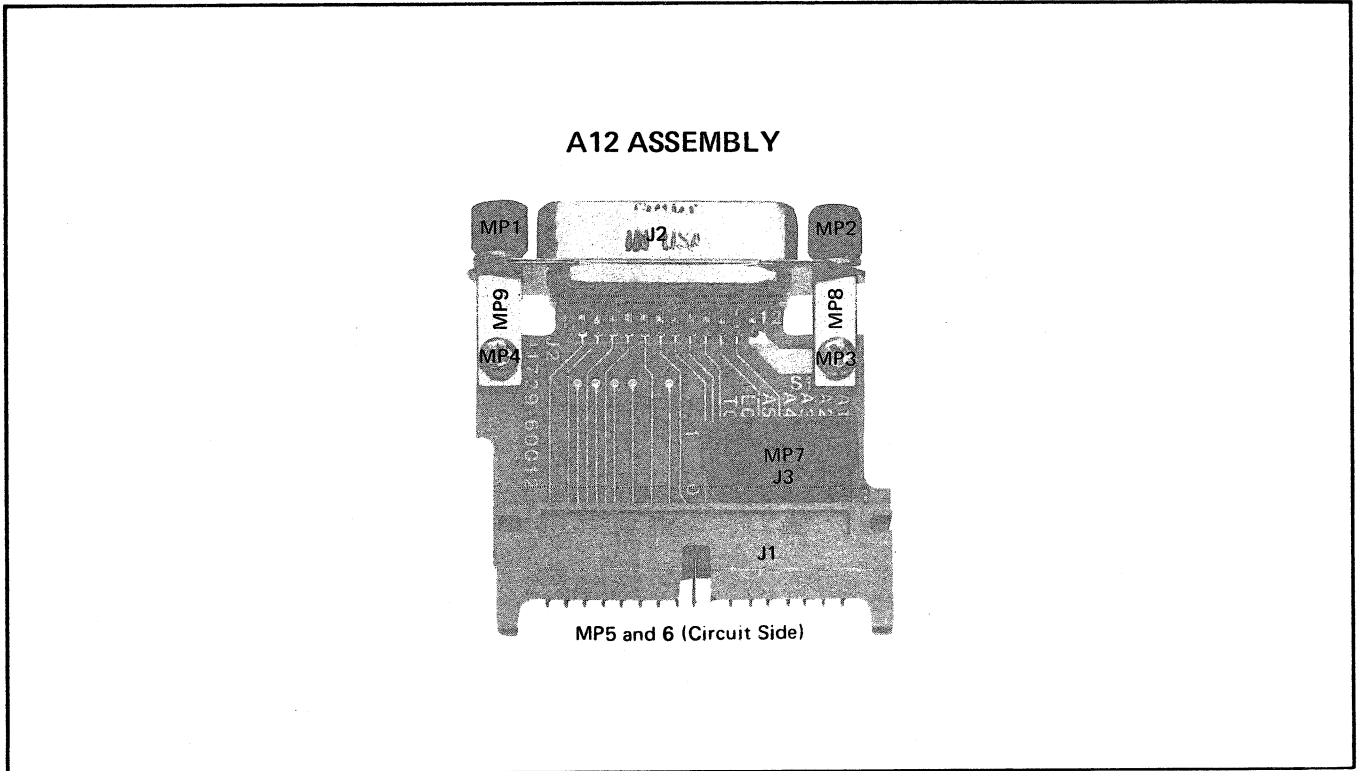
HP-IB Interconnect Board Assembly Component Locations
